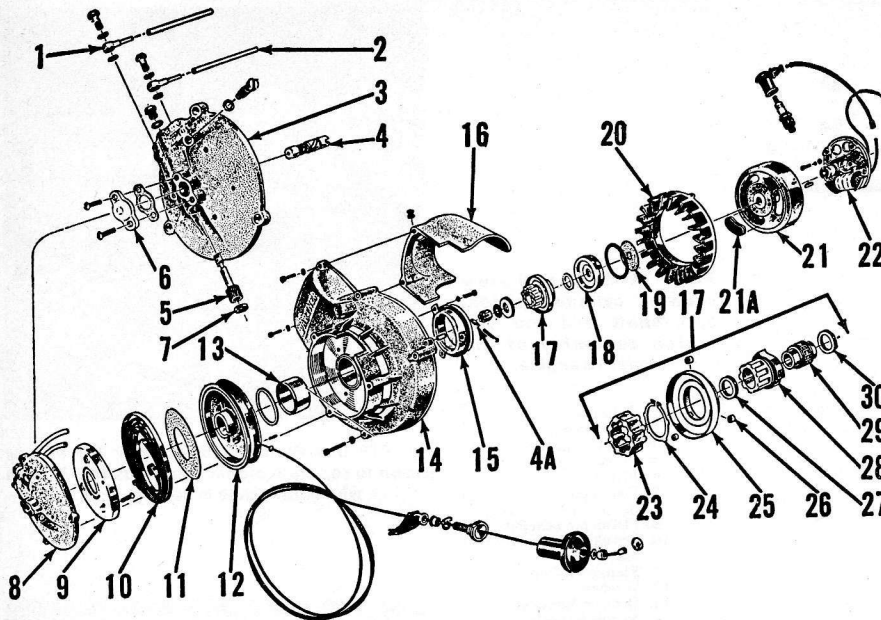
Exploded view of chain oiler pump, rewind starter, blower housing and magneto of R11 and X21 chain saw engines.
